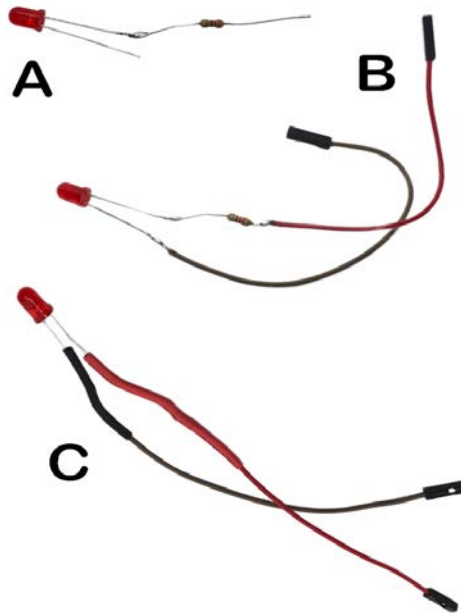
Soldering a resistor and jumper wires to our LED
